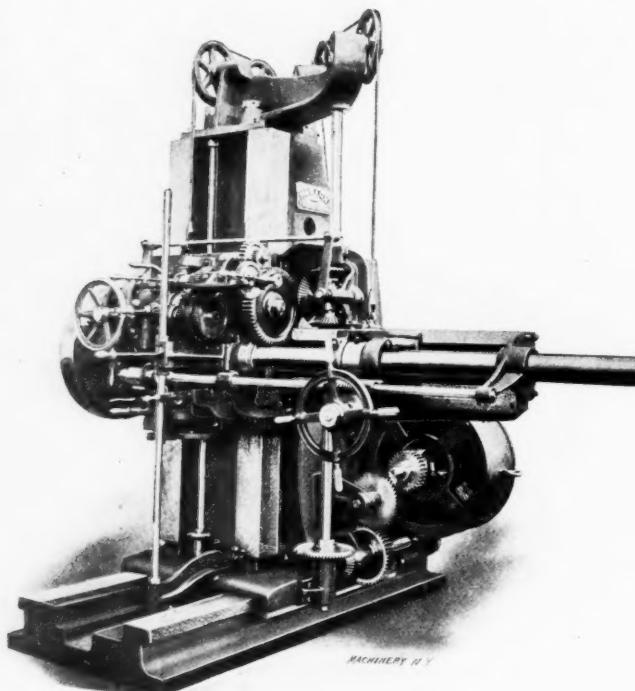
Newton Horizontal Boring, Drilling and Milling Machine.
